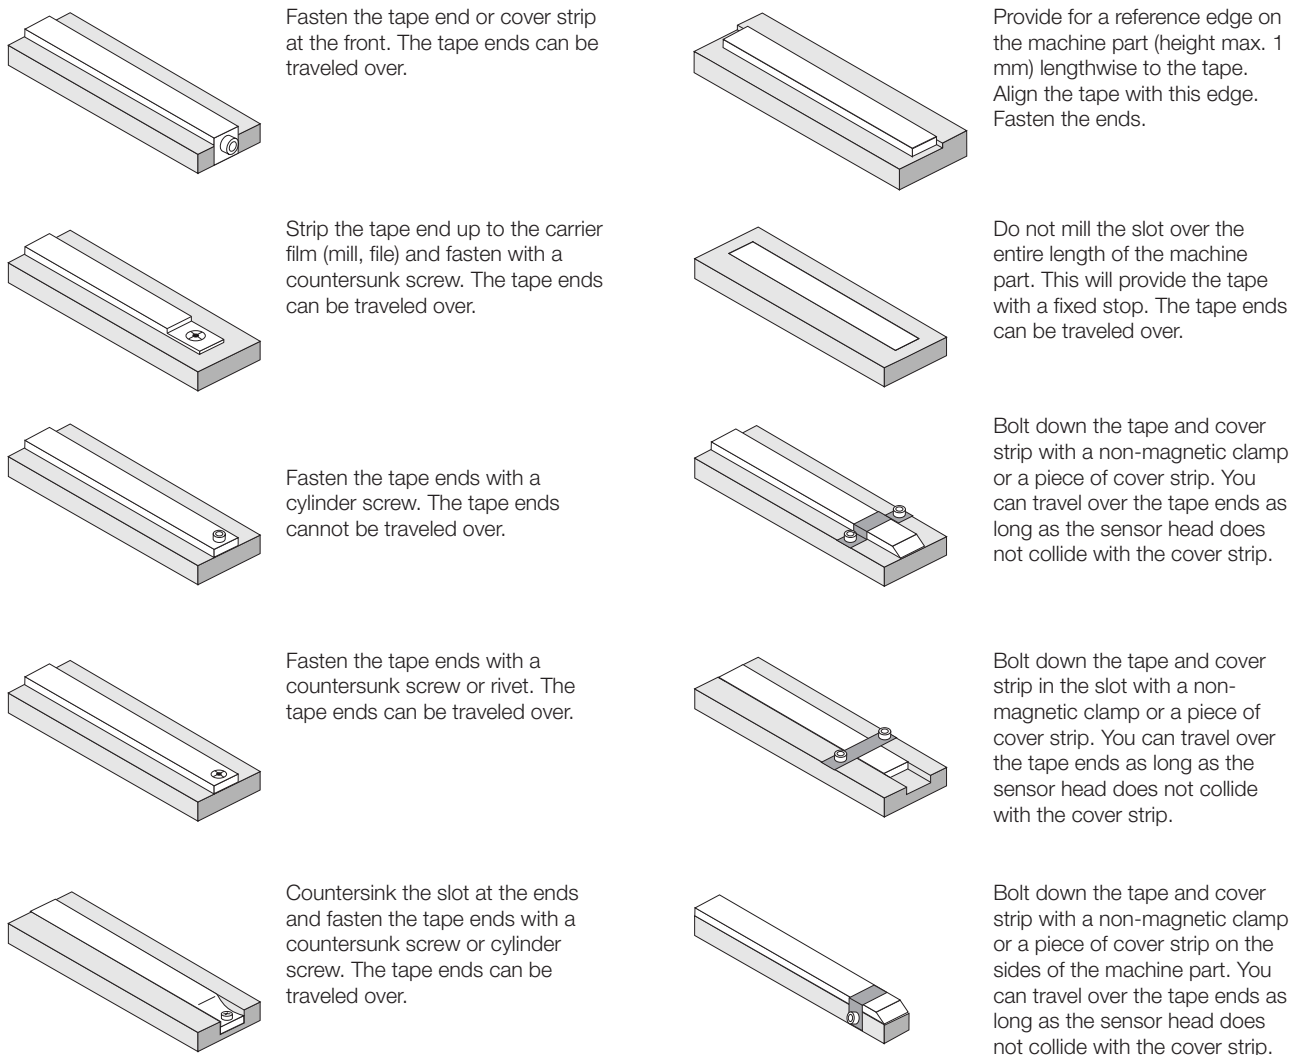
Fasten the tape ends with screws, rivets, and clamps
